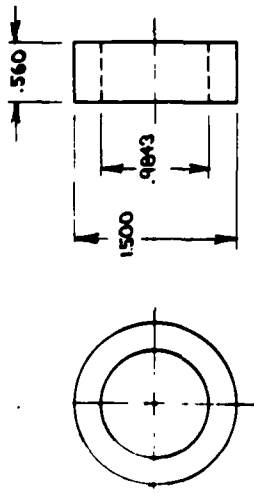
Bearing Block and Motor Mounting Plate - El Axis.
